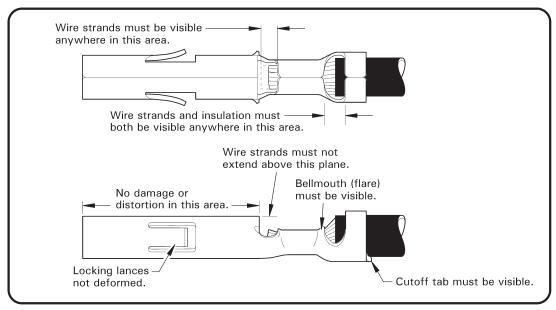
Crimp Inspection (installed socket shown)
